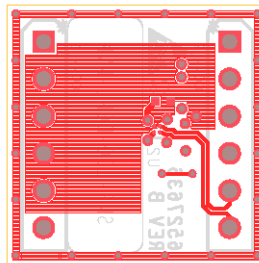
SMP-TPS7A1601-MVK Board Layer 4 – Bottom Side
